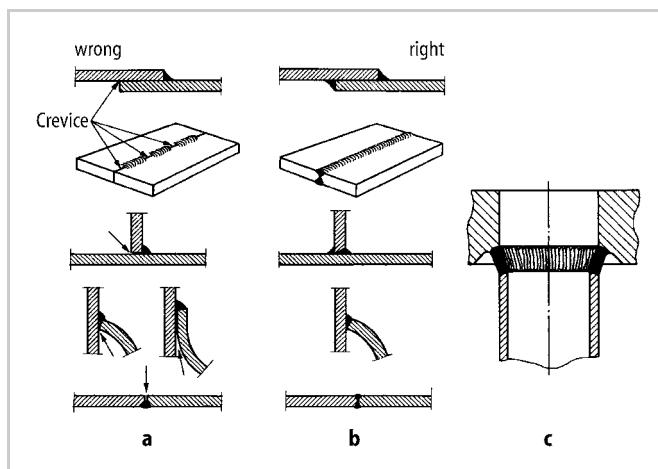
Examples of welded joints: a susceptible to crevice corrosion; b correct design, after [7.260]; c crevice-free welding of pipes, also improves resistance to stress corrosion cracking
